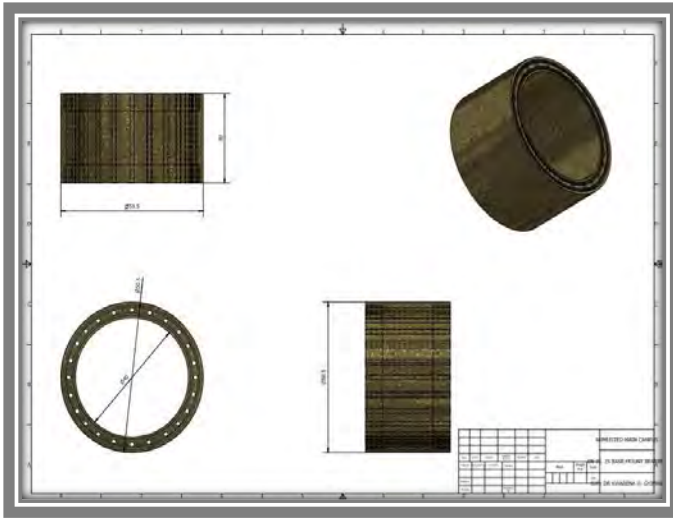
, SN 25: Main Hydraulic Piston Base Mount Bearing
